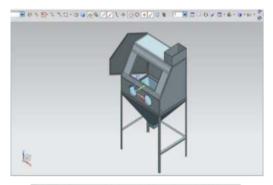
3Dassembled model of Abrasive Blasting Equipment
